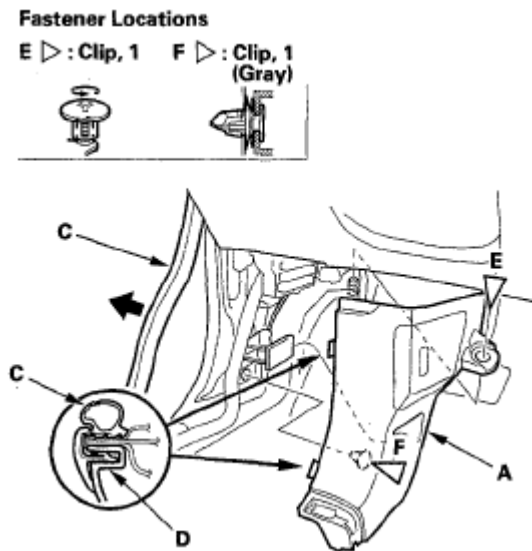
Identifying Door Opening Seal, Kick Panel Hooks And Clip - Driver'S
